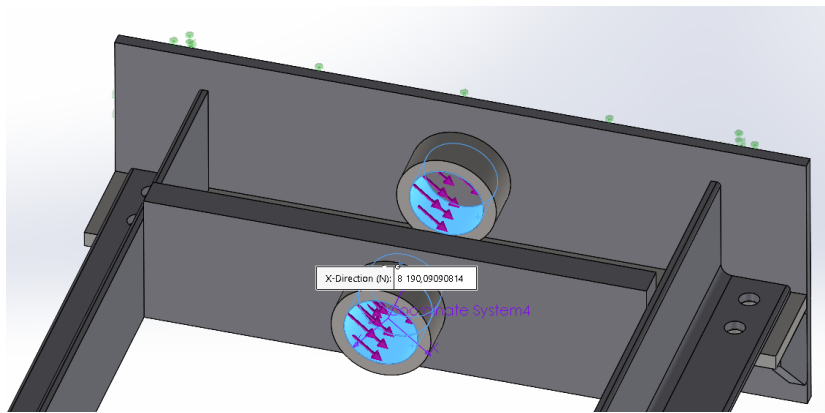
FEM set-up for the angle and force B with a bearing load.
